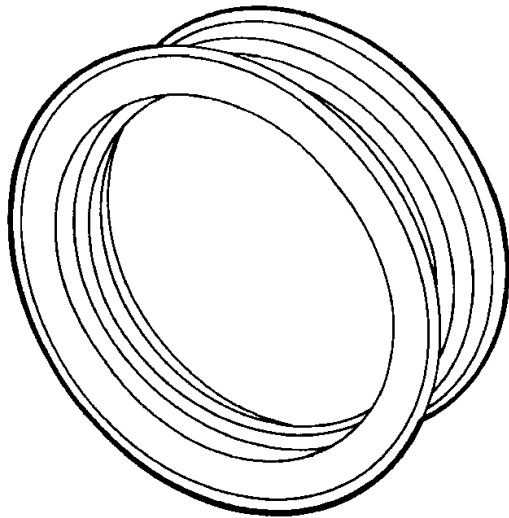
Rim for Cast Spoke Wheel with Tubeless Tire
